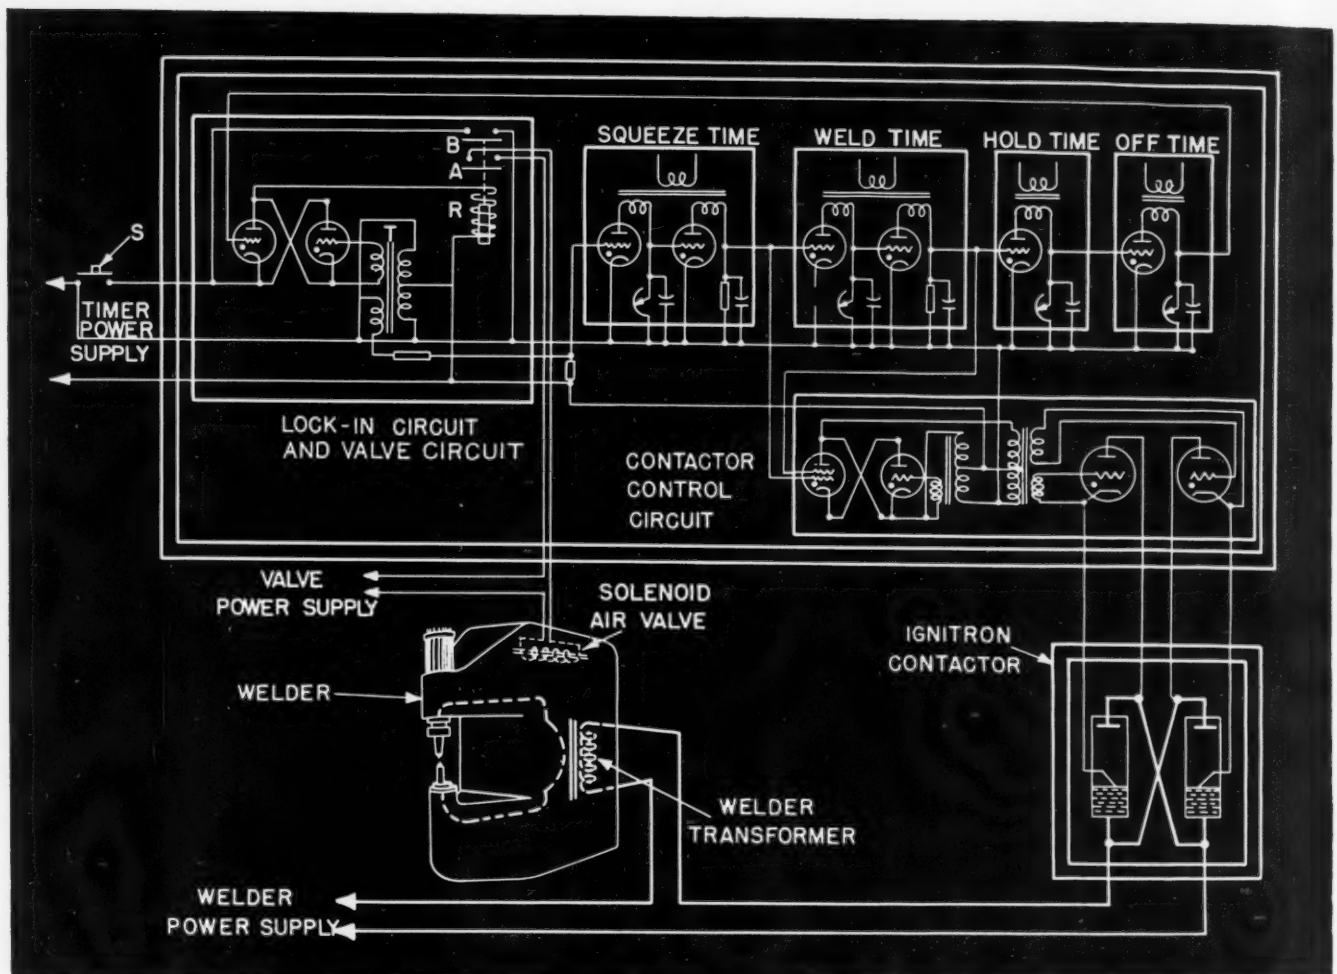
Simplified Circuit Diagram of the Weltronic Sequencing Weld Timer that is Used to Automatically Control the Resistance Welding Operations
